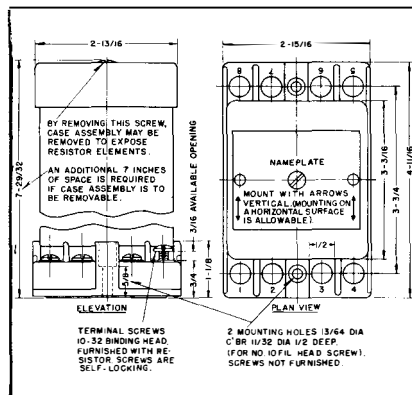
Outline Dimensions and Drilling Plan for VR-825 External Resistor.
